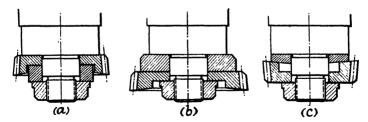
Methods of Mounting Standard Cutters on Maxicut Machines
